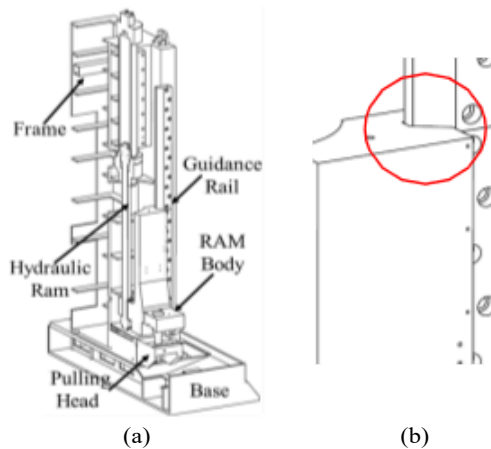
(a) Cutaway of broach machine and (b) Ram body and guide rail
